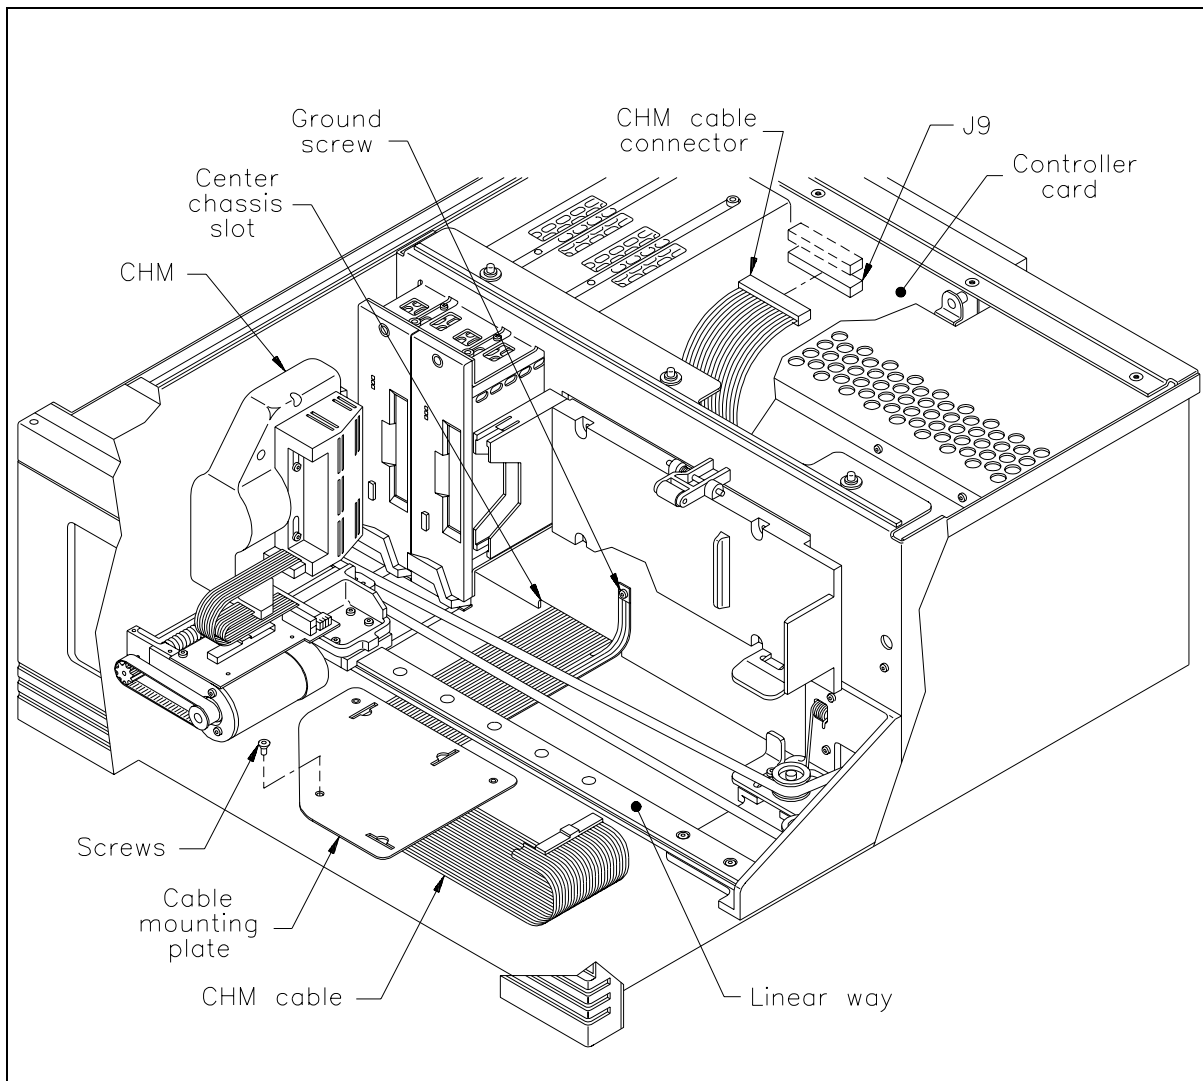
Aligning the CHM cable and securing the mounting plate to the chassis
